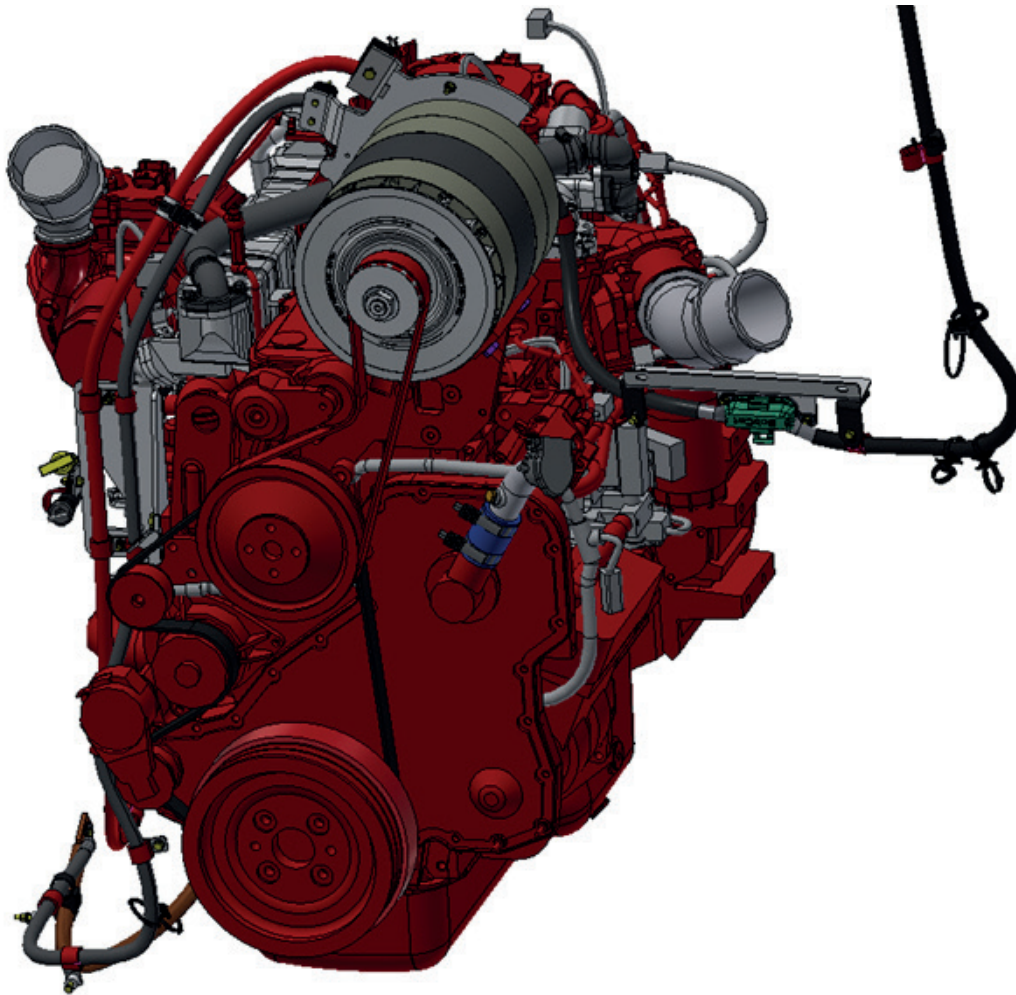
New Air Cooled Alcott Generator (Some Parts Removed for Clarity)
